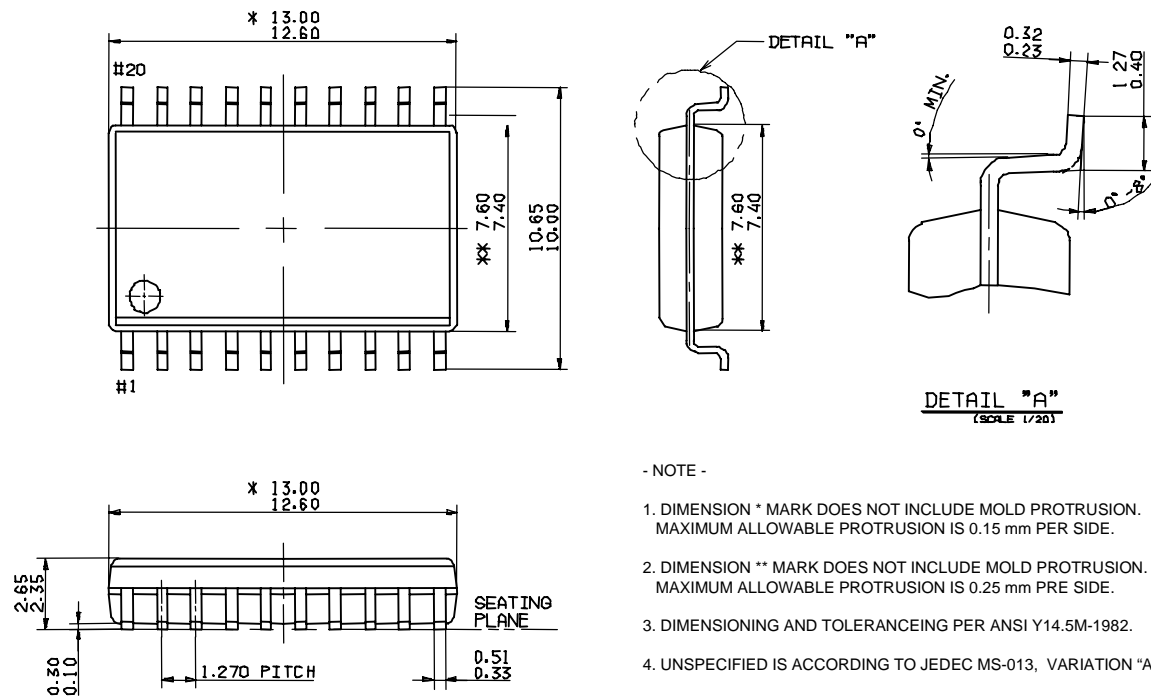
20SOP (300MIL) Pin Dimension (UNIT : mm)
